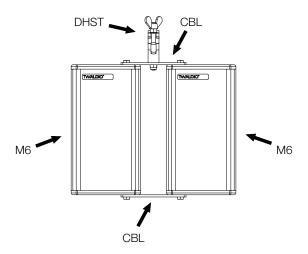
Assembly CBL to M6 loudspeaker at DHST
